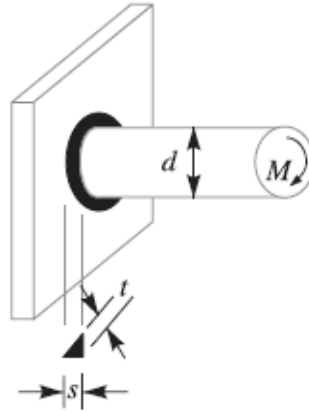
Circular fillet weld subjected to bending moment.
